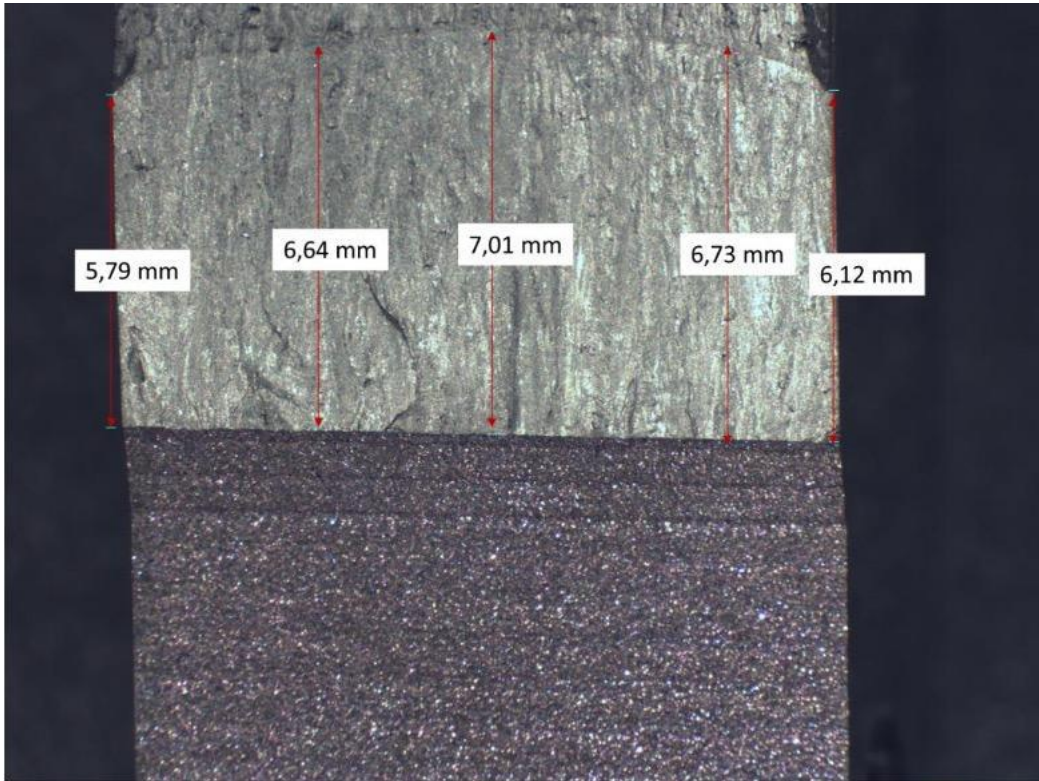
Fracture toughness crack measurement for 6.5 m/s 2
